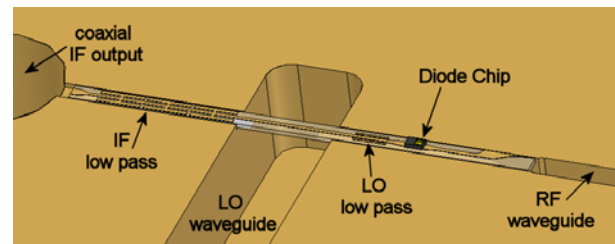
4th Harmonic Mixer Design - Splitblock Bottom Part
